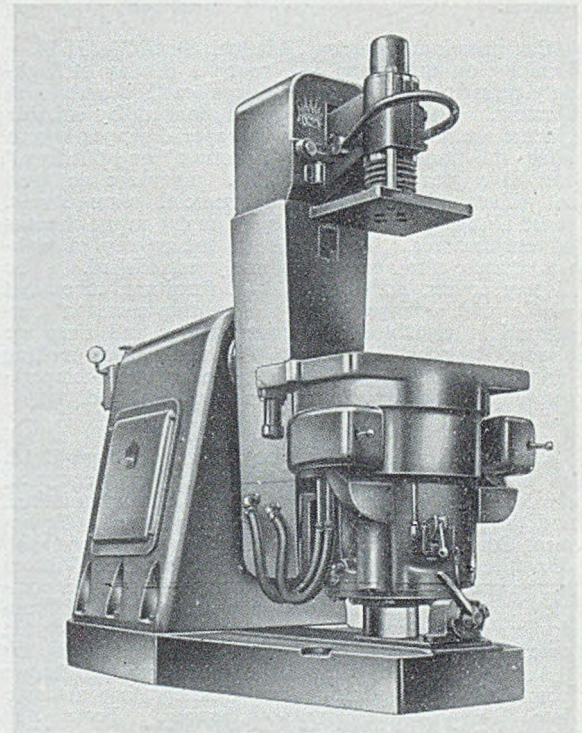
Type B.T. Turnover Moulding Machine which British Moulding Machine Company, Limited, are showing for the First Time in this Country.
